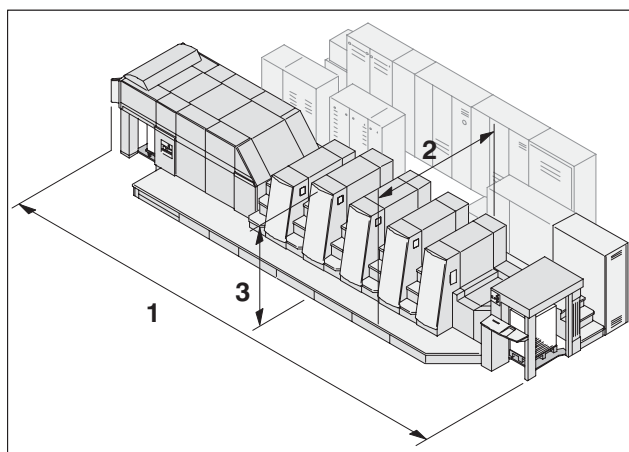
Dimensions of the printing press with DryStar UV in standard installation (XL 75-4 + L)
